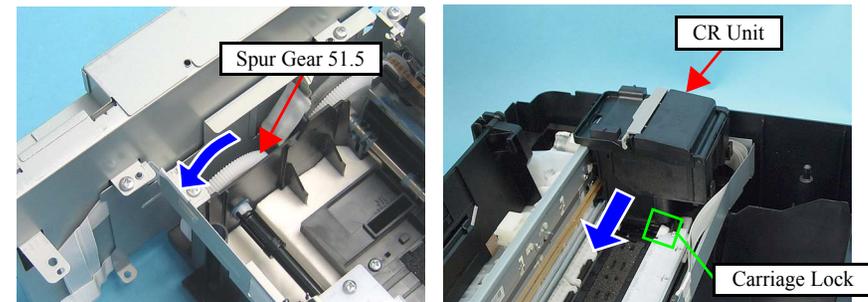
Unlocking the Carriage and Moving the CR Unit
